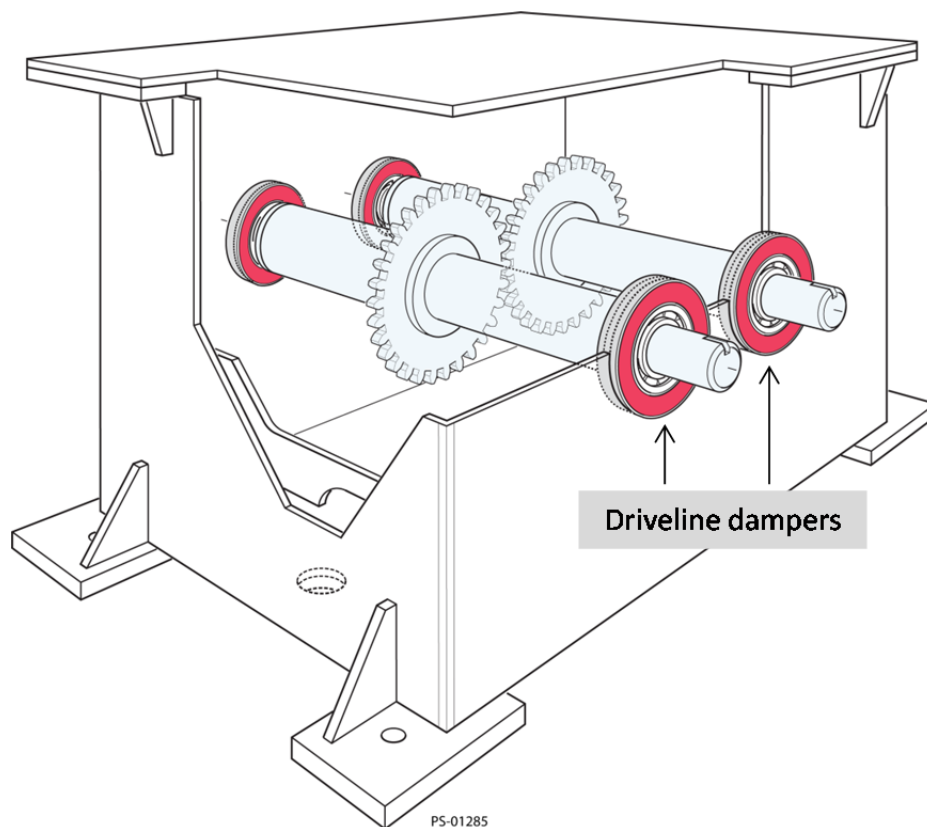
Concept drawing of driveline dampers mounted around the shaft bearings of a gearbox. The dampers reduce the driveline vibration and in-turn lower the amount of energy transferred through the gearbox housing to the rest of the machine.
